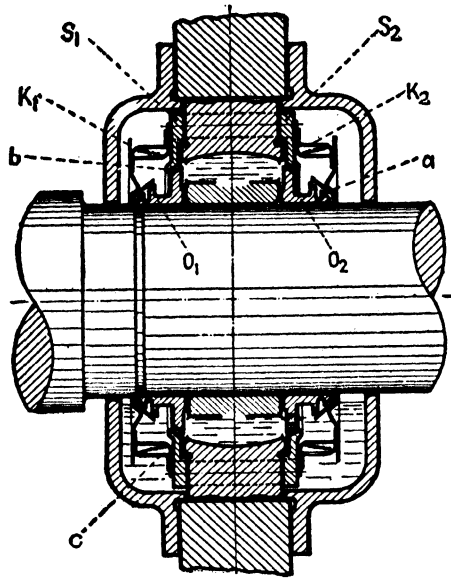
Nomy bearing. Baffle plate arrangement. The oil that leaves the bearing surfaces is retained inside the fixed baffle plates K_1S_1 and K_2S_2 ; the oil reaching the narrow spherical spaces $a-b$ between the oil throwers O_1O_2 (which revolve with the shaft) and the baffle plates is constantly forced back and prevented from leaking out by the centrifugal force and the adhesion to the revolving oil throwers.
